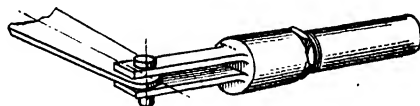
END DETAIL OF PHASE INTERCONNECTING ROD USING A SCREWED TUBE IN TENSION AND COMPRESSION
